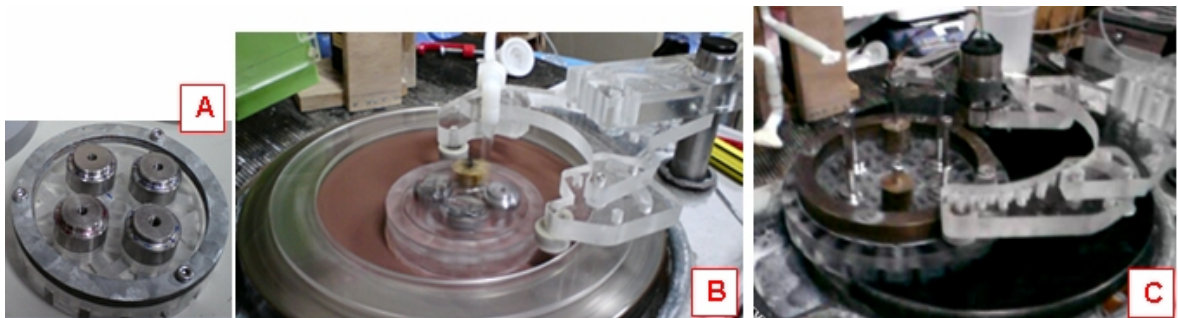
(a) Small workpiece fixture (b) polishing of small workpiece fixture is operation. (c) final polishing with large workpiece fixture is running.
